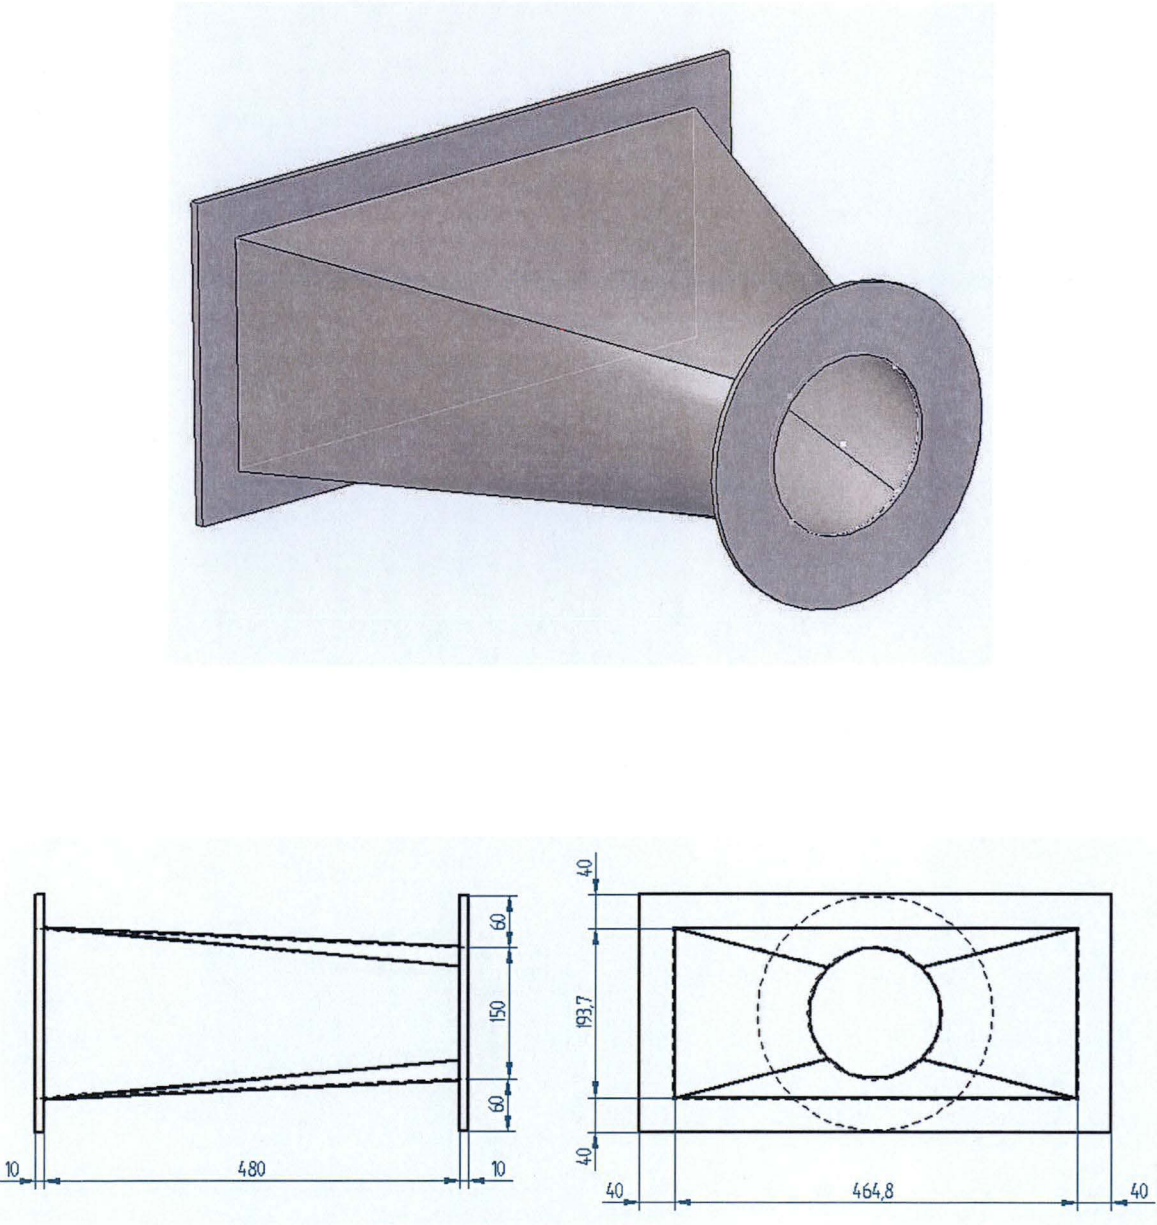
Contraction cone at the outlet of the extension box (All dimensions in mm)
